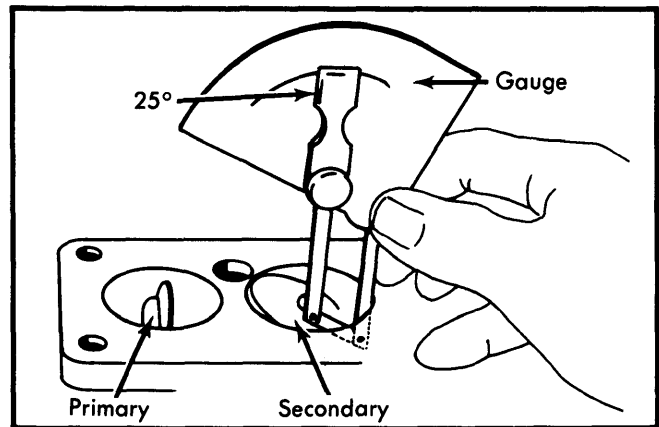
Adjusting Secondary Throttle Opening Angle (Kick-Up)
